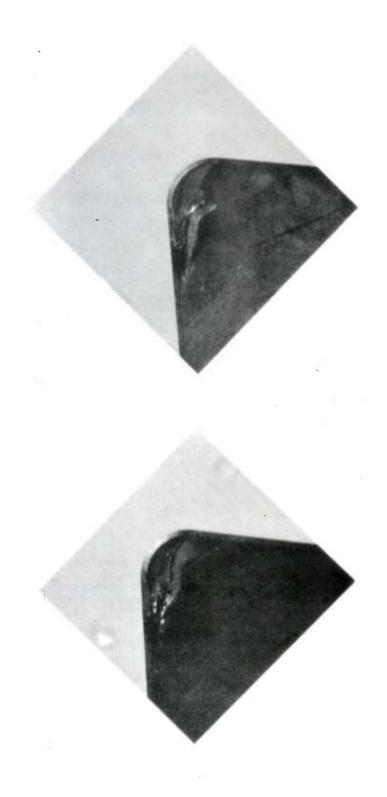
Photos showing Cracking of Nose Radius and Top Rake Surfaces of G-10 Inserts.
